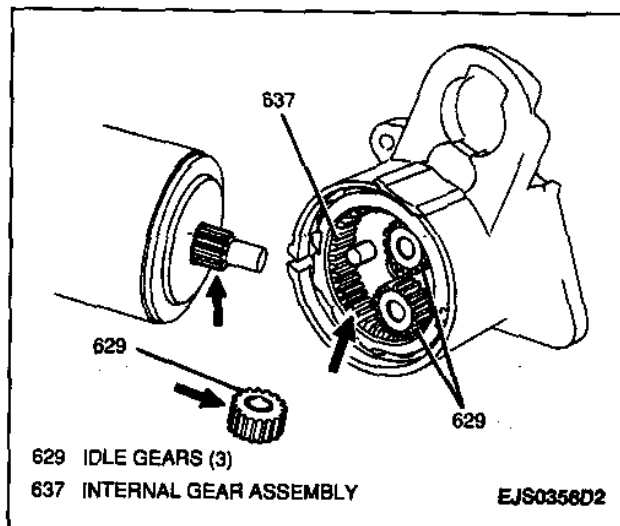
Inspecting Internal Gear Assembly and Idle Gears
